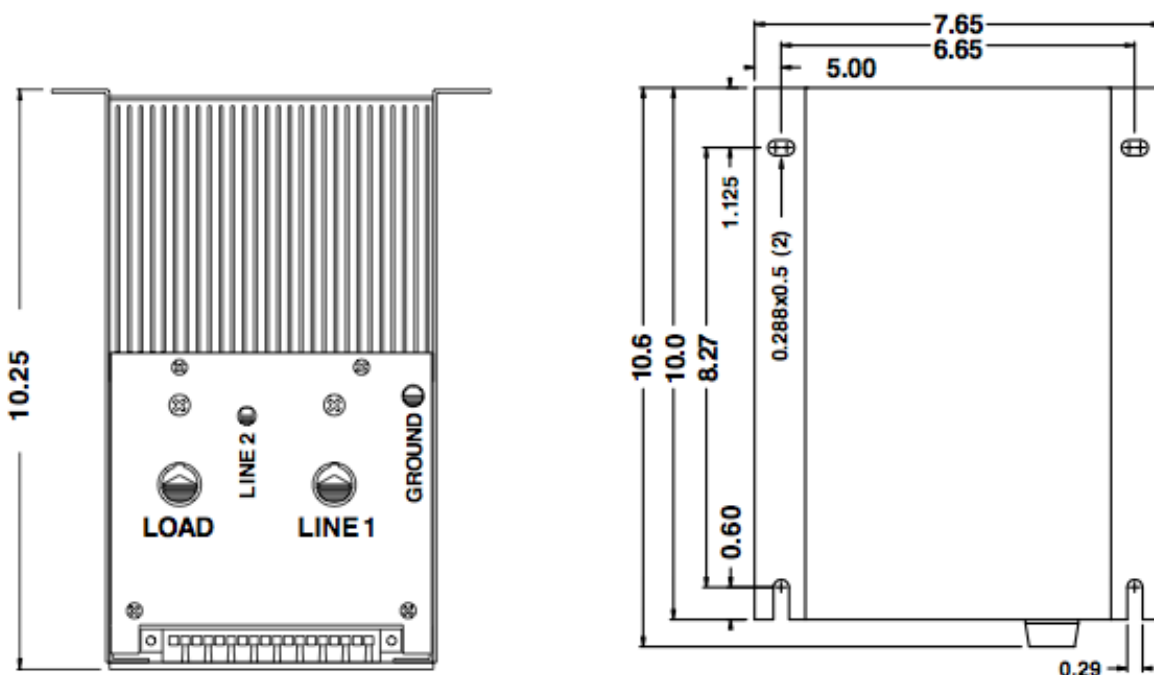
Installation dimensions 50, 80, 120 & 160 Amp
